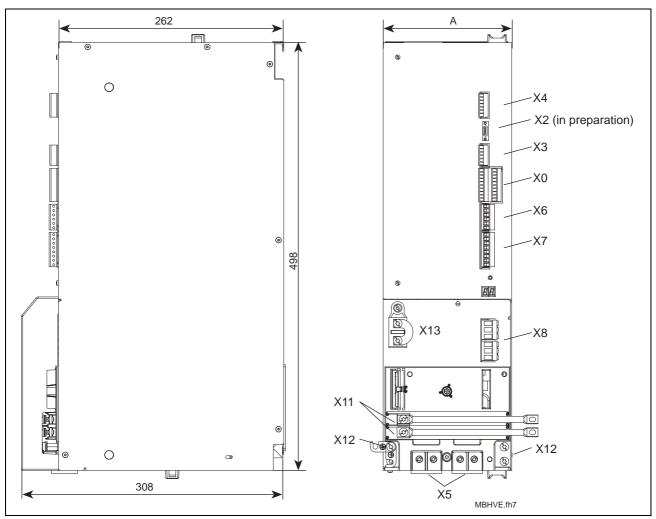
Dimension drawings HVE02.2 and HVE03.2
